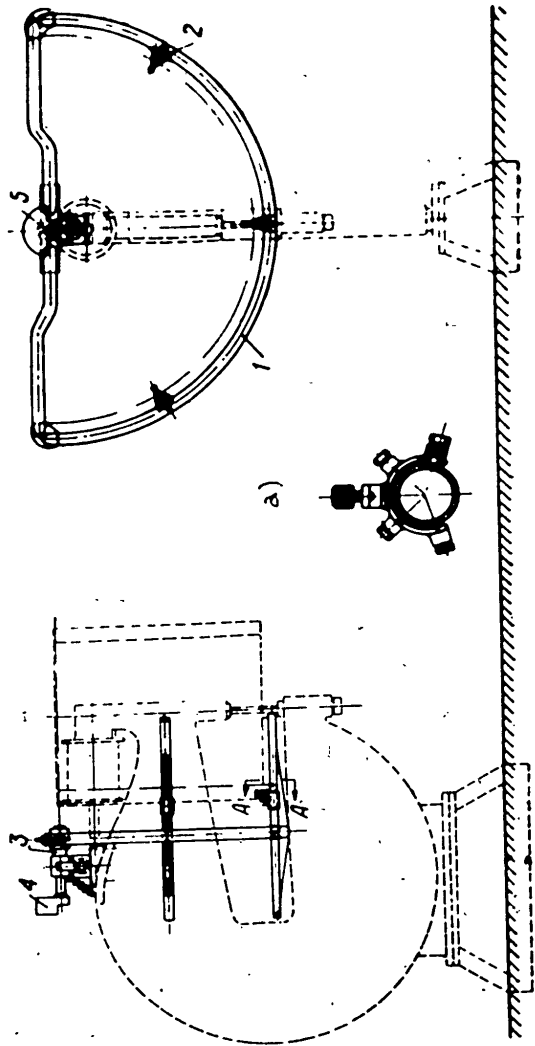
Support and Conveying Equipment Mounted to the Housing of the Press KP-204 for Riveting the Semicircular Section of the Cowling Cover
